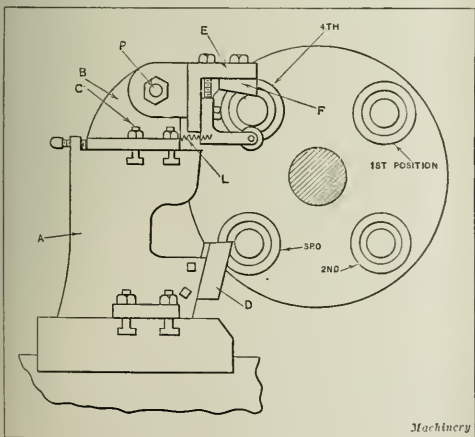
Double-deck Tool-holder used on Gridley Automatics
